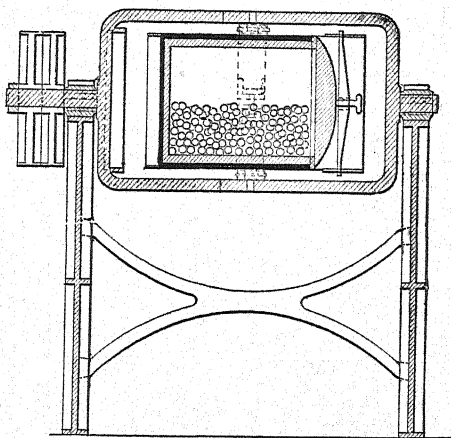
Section of single-jar mill. (*Abbé Engineering Co., New York.*)
